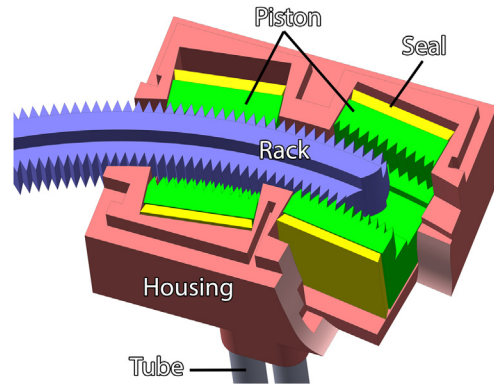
Cut-out view of a curved stepper motor, exposing the two pistons, four seals and rack in the housing.
